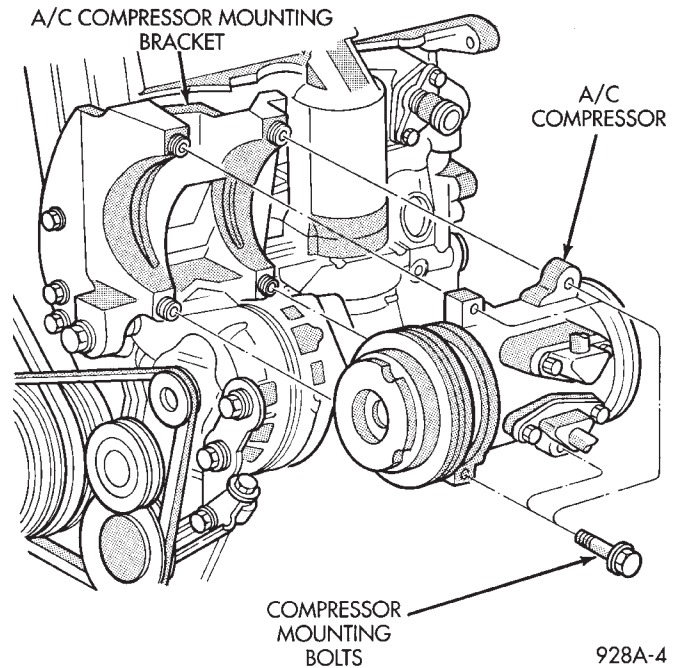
A/C Compressor Removal and Installation—2.5 L Engine
